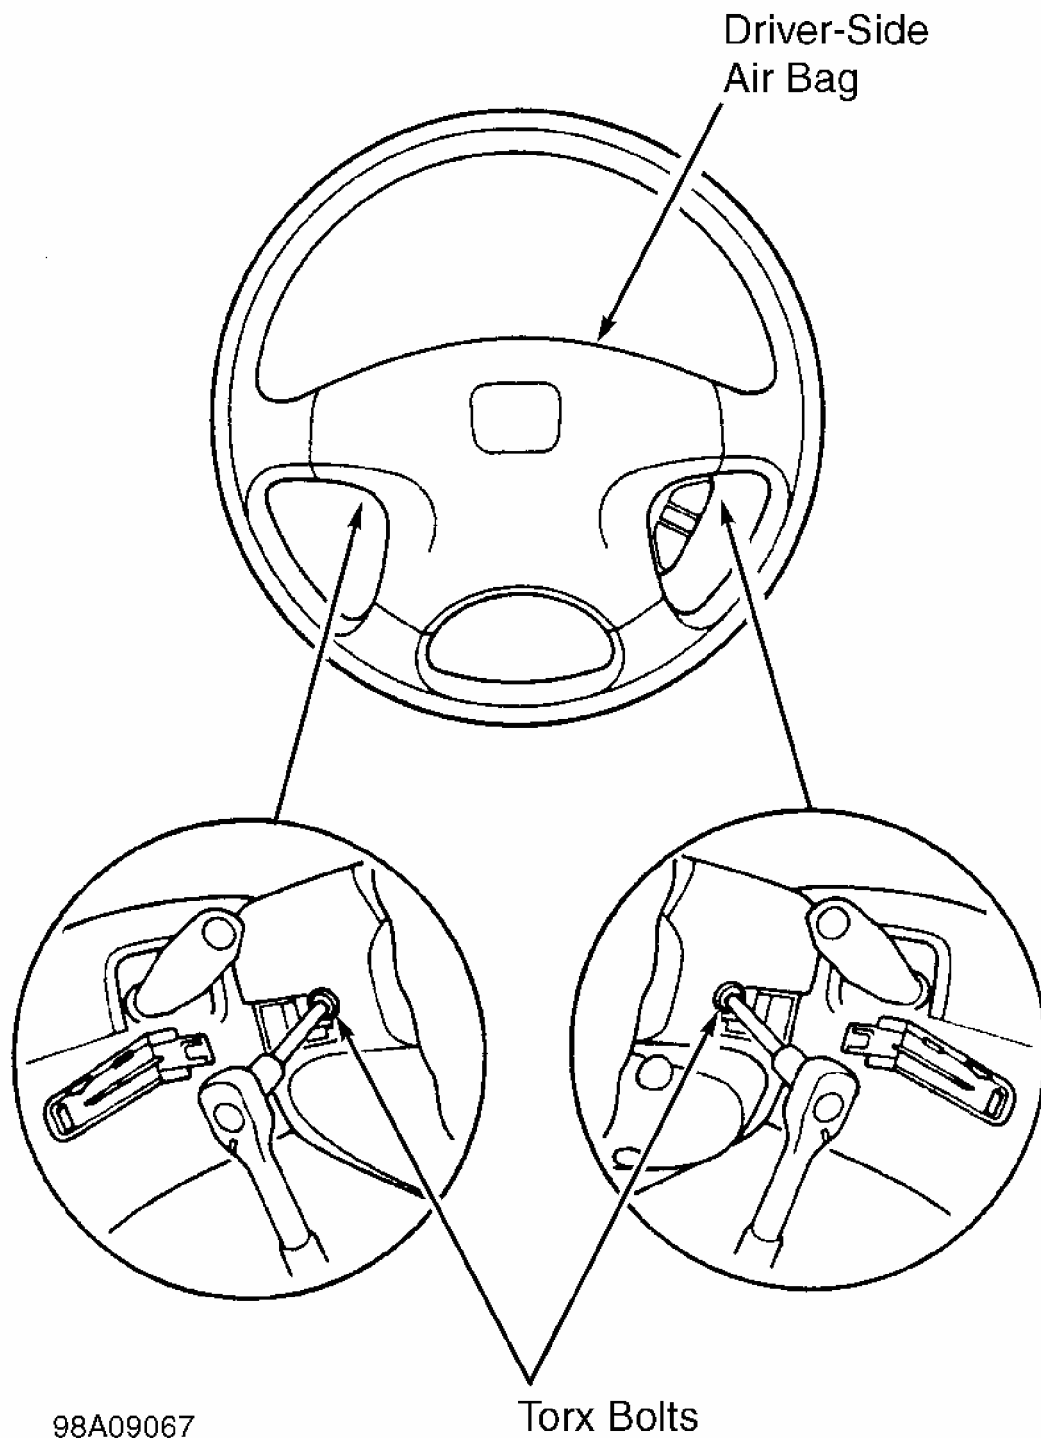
Removing Driver-side Air Bag Torx Bolts
